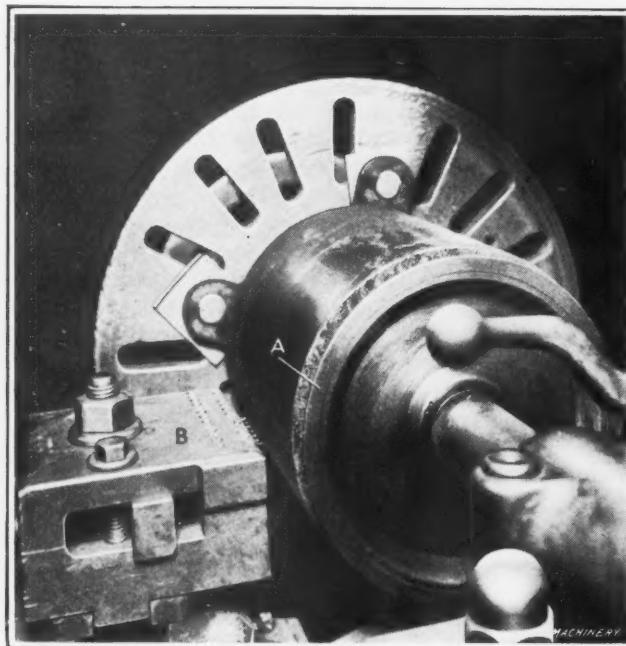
Method of chucking a Pot Casting for turning Air Pump Piston-rings, and Multiple Parting Tool used
